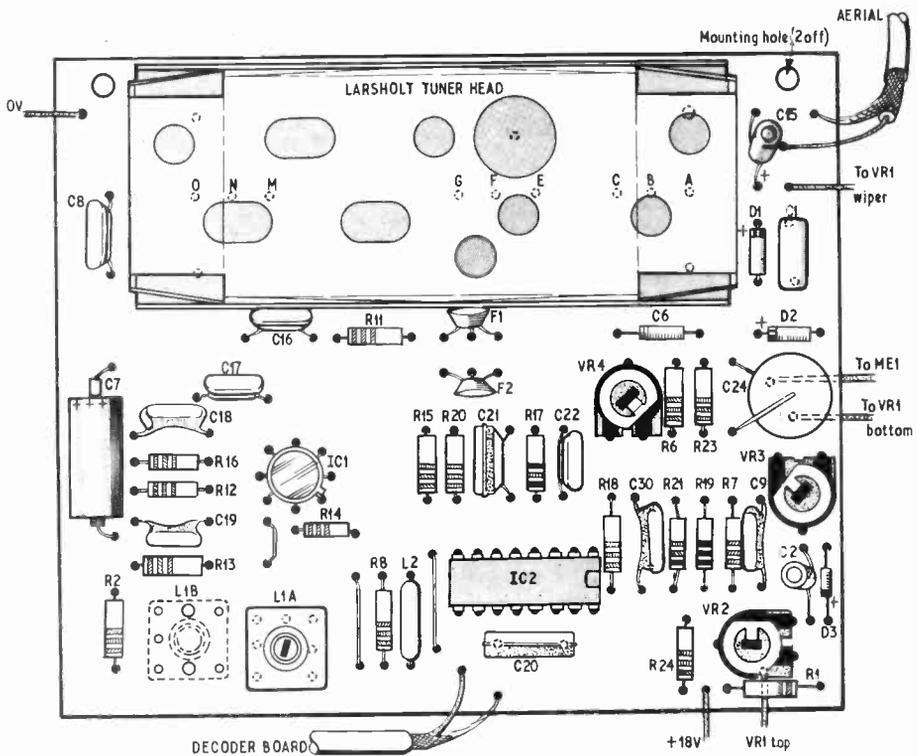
Component layout for the tuner board. The L1B option is discussed in Part 8
